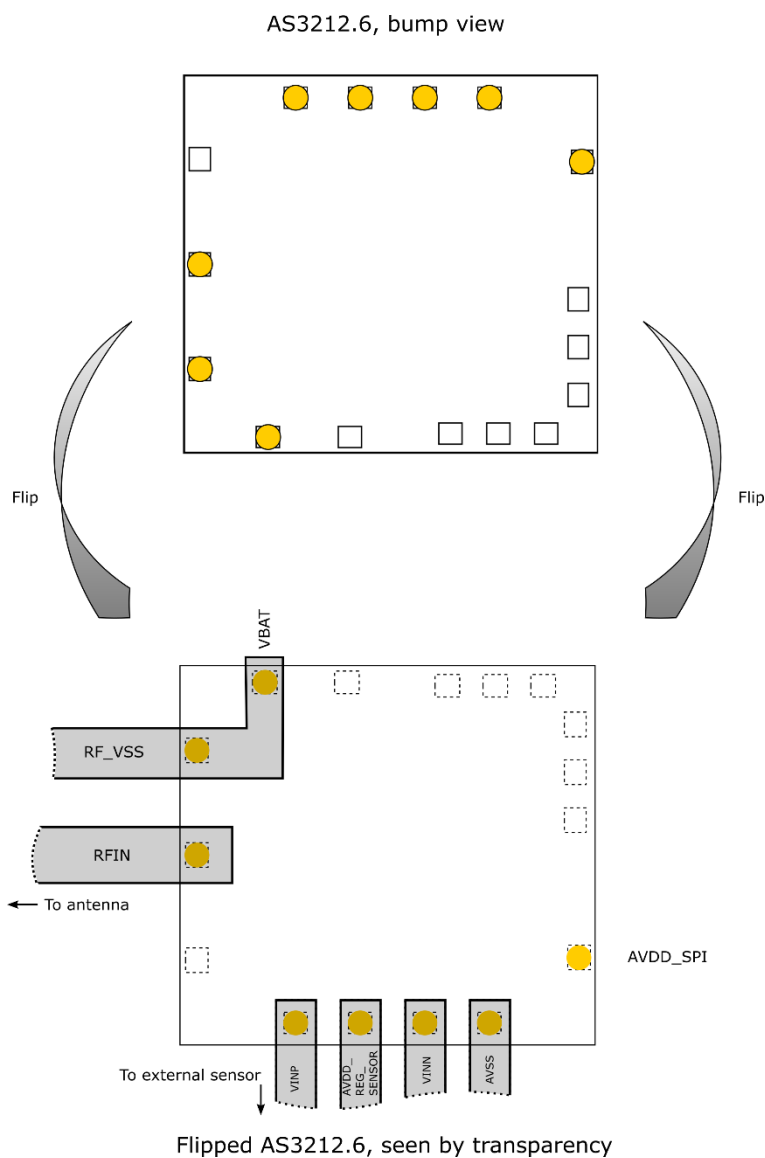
Recommended landing pattern for flip-chip assembly of bumped dies (front assembly view, flipped die)
